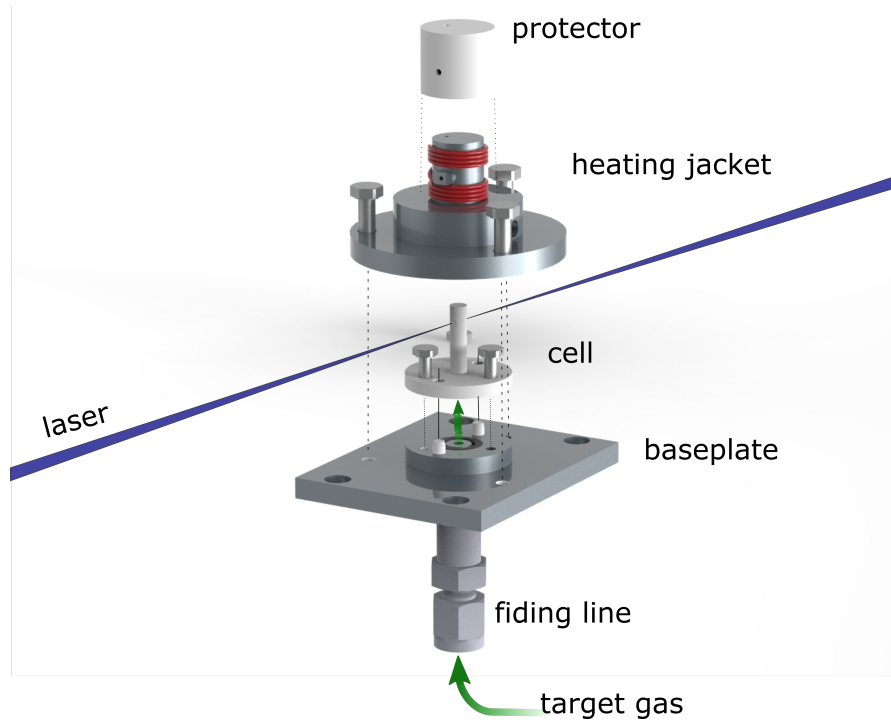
The new designed target cell. It consists of three parts: baseplate, cell, and heating jacket. It is designed to withstand longer to VIS laser and for fast assembly. The dowel pins in the baseplate make realignment obsolete. It is mounted on a fast three-axis translation-stage system with high precision.
